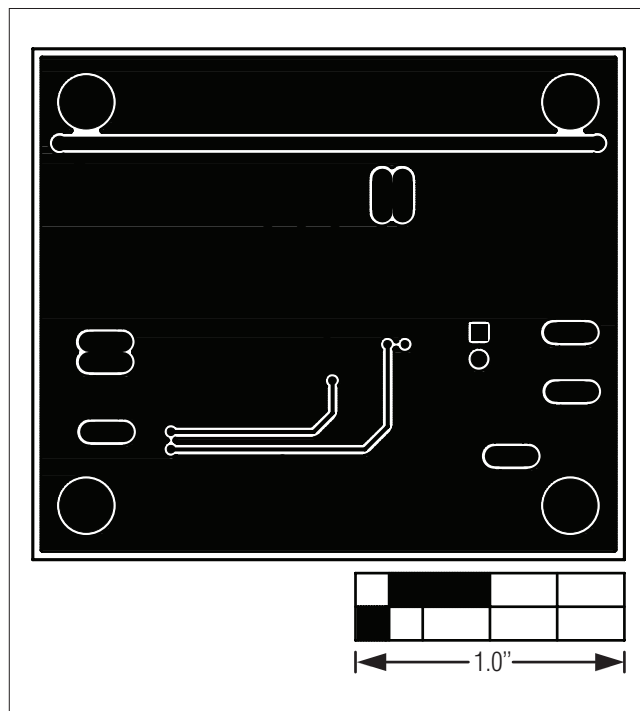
MAX15050 EV Kit PCB Layout—Solder Side
